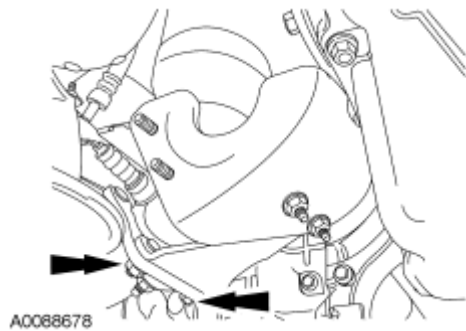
Locating Bolts On Rear Of Exhaust-To-Intermediate Shaft Bracket
